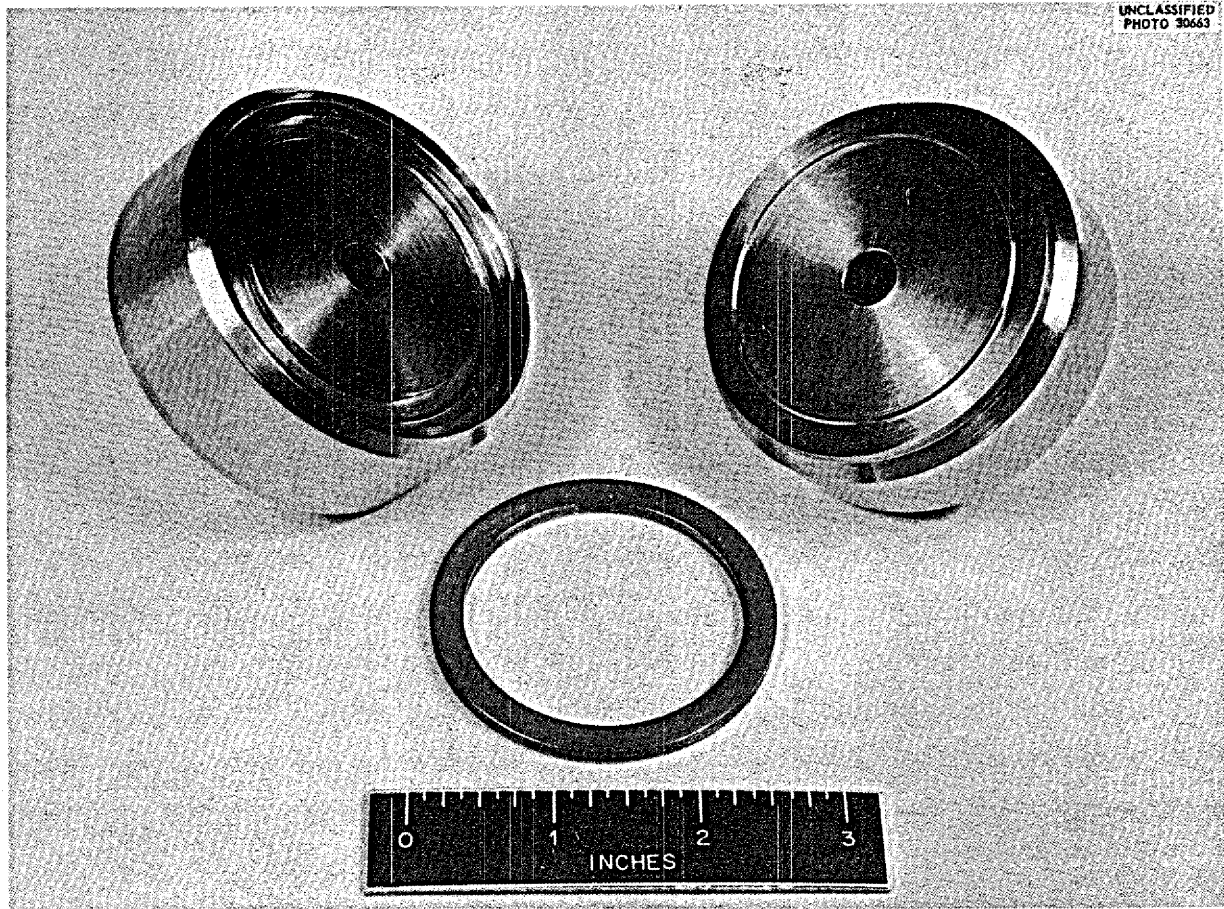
Components of an Indented-Seal Flange Joint.
